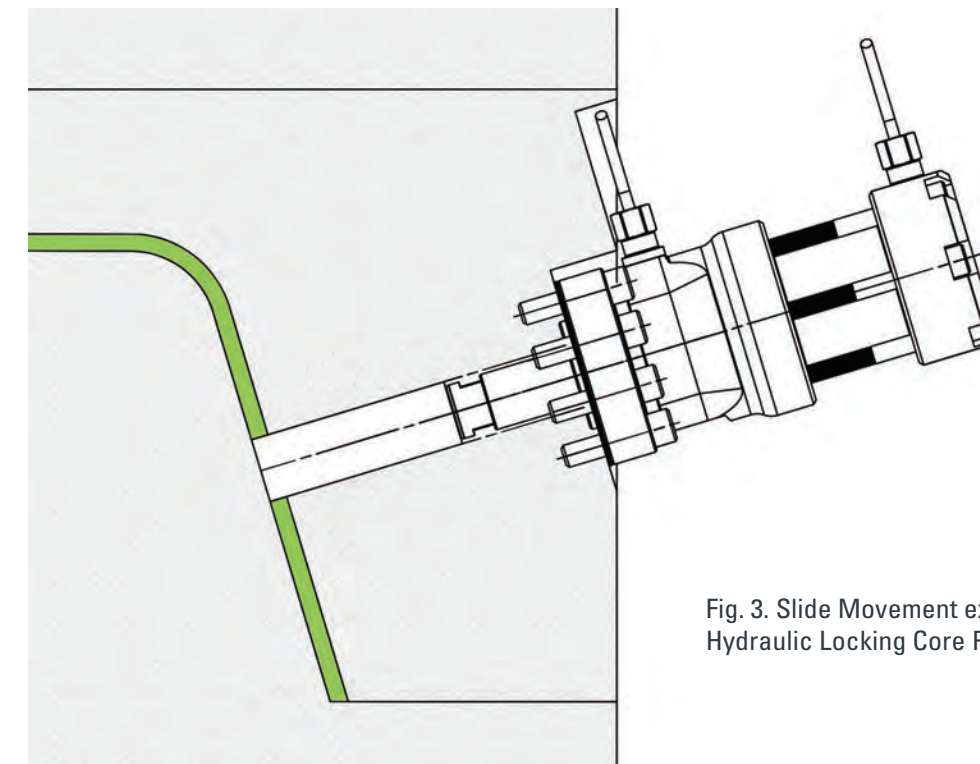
Slide Movement example using the Hydraulic Locking Core Pull Cylinder.
